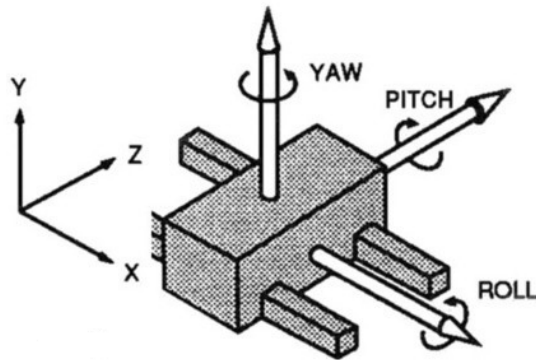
Six degrees of freedom for a machine tool moving assembly.
